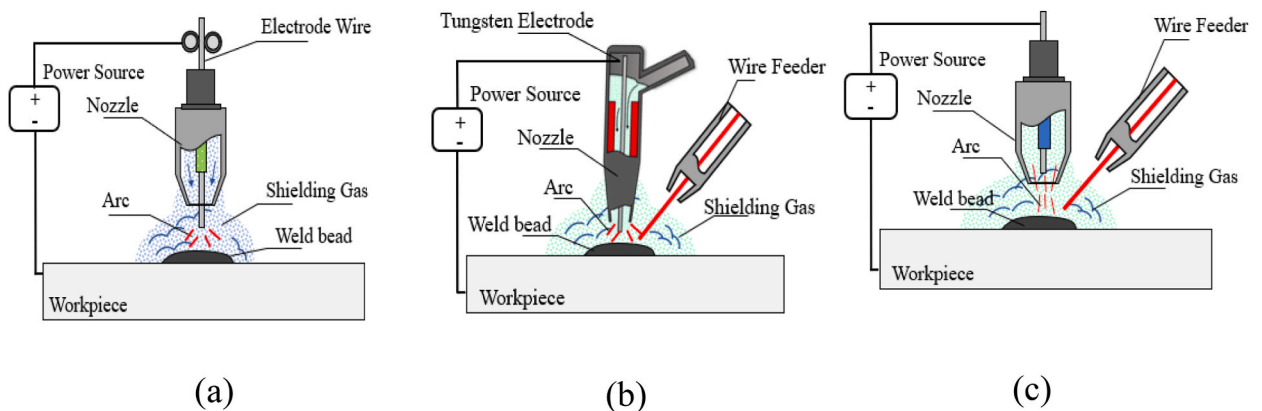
Schematic of different types of arc welding techniques: (a) GMAW, (b) GTAW, and (c) PAW.
